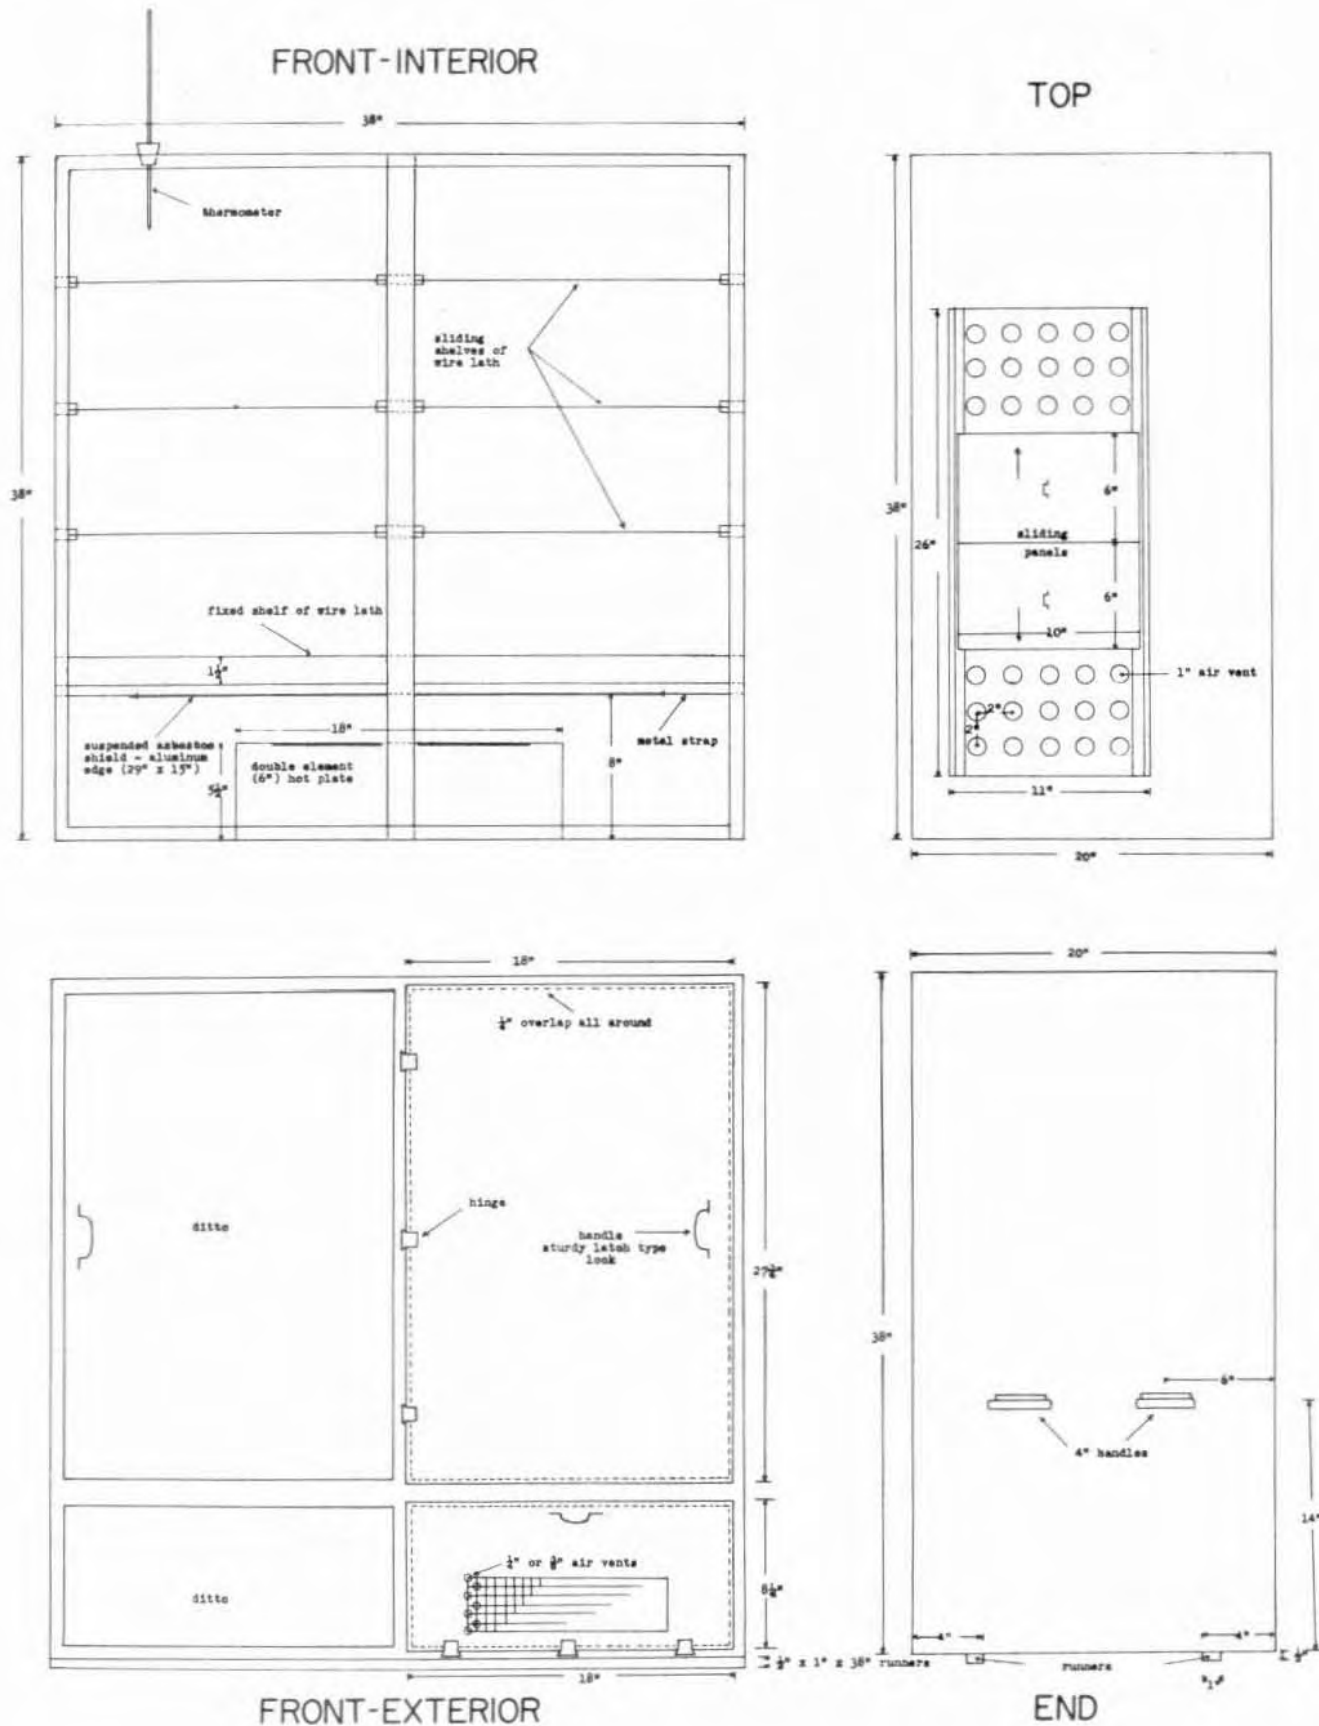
SPECIMEN DRYER - Aluminum construction - asbestos lined
